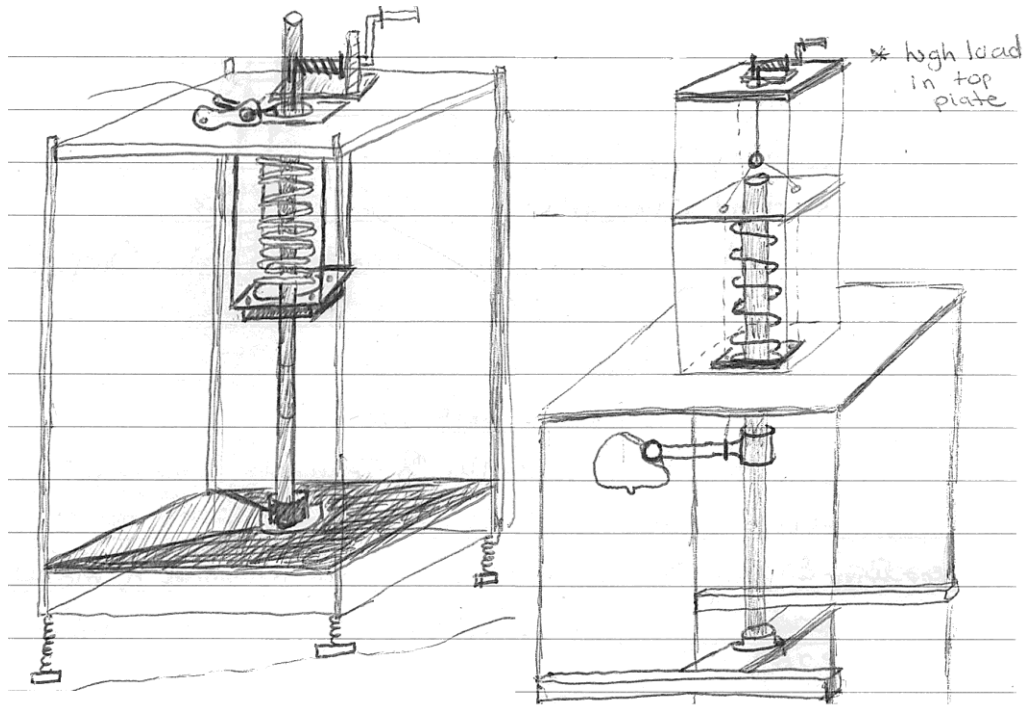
Schematic drawings illustrating concepts for the bottom frame design.
